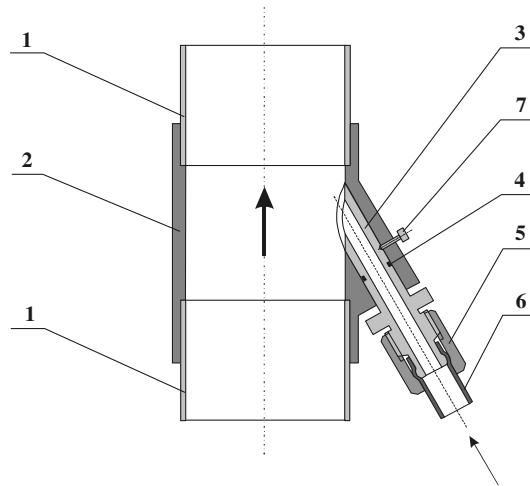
Gas distributor: 1—metal pipe segments, 2—metal casing, 3—exchangeable nozzle, 4—rubber seal (o-ring), 5—packing nut, 6—gas pipe, 7—clamping screw.
